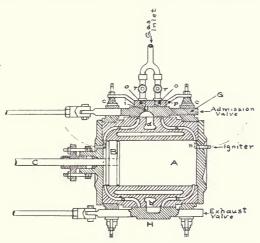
Horizontal Section of Cylinder and Valves of Lenoir Engine.
